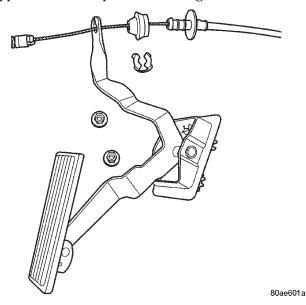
Accelerator Pedal and Throttle Cable(4) Pull back the carpet.
